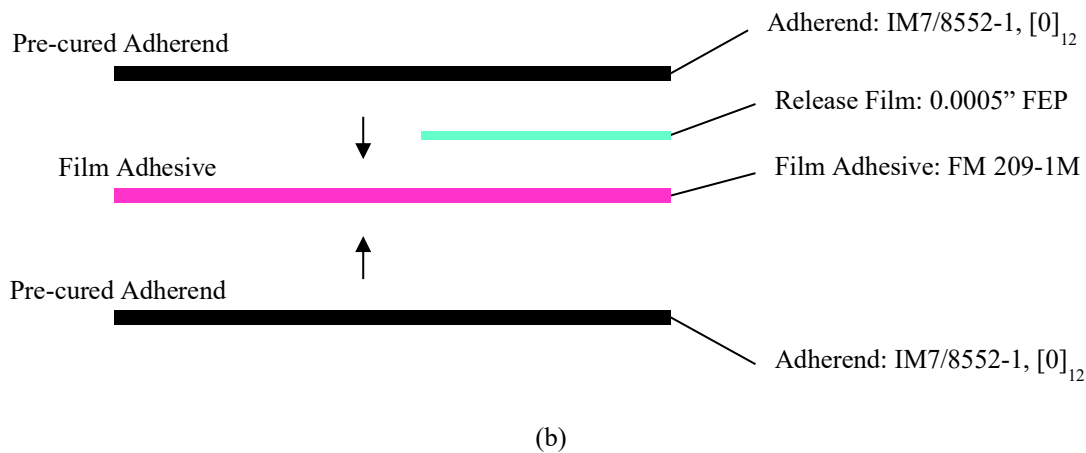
Overview of bonded assemblies fabricated to yield (a) single lap shear test specimens and (b) double cantilever beam (DCB) test specimens.
